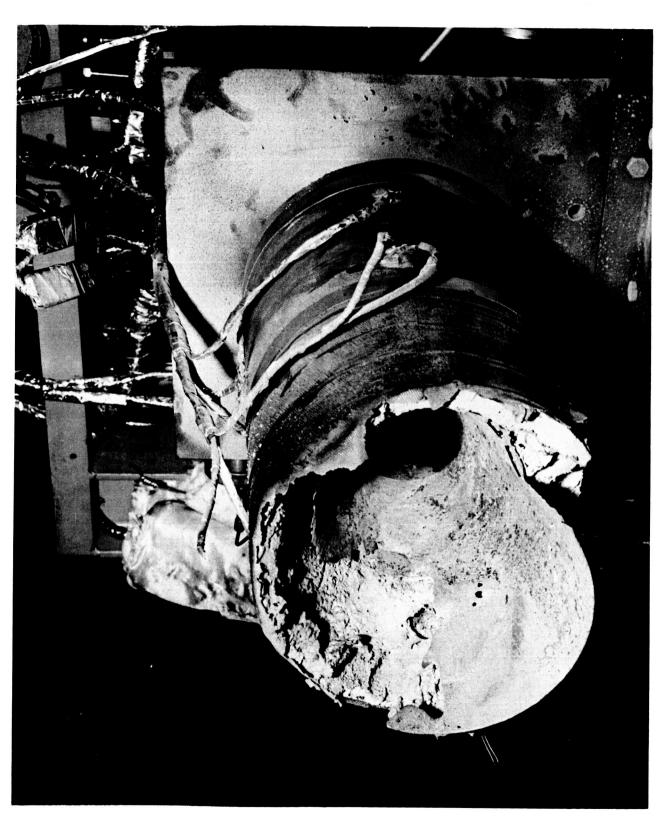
Engine Assembly S/N 2 After Fire Test
